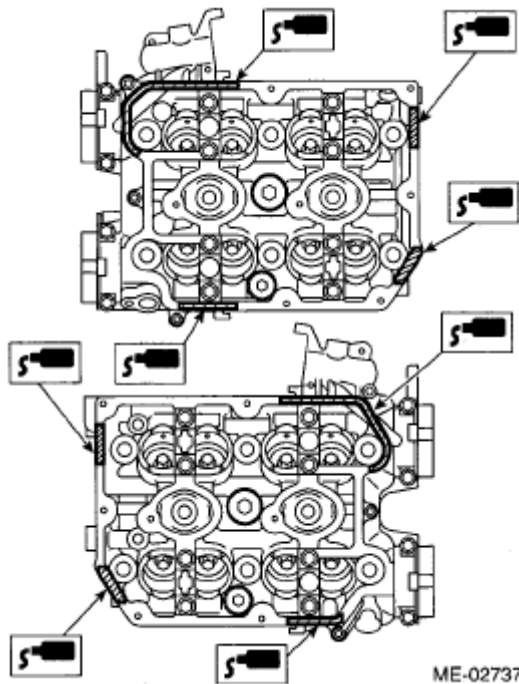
Applying Liquid Gasket To Cylinder Head Gasket
